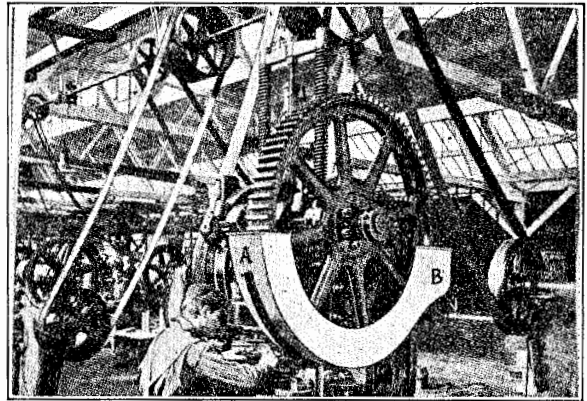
View of Metal Guard Covering Large Cog Wheel
